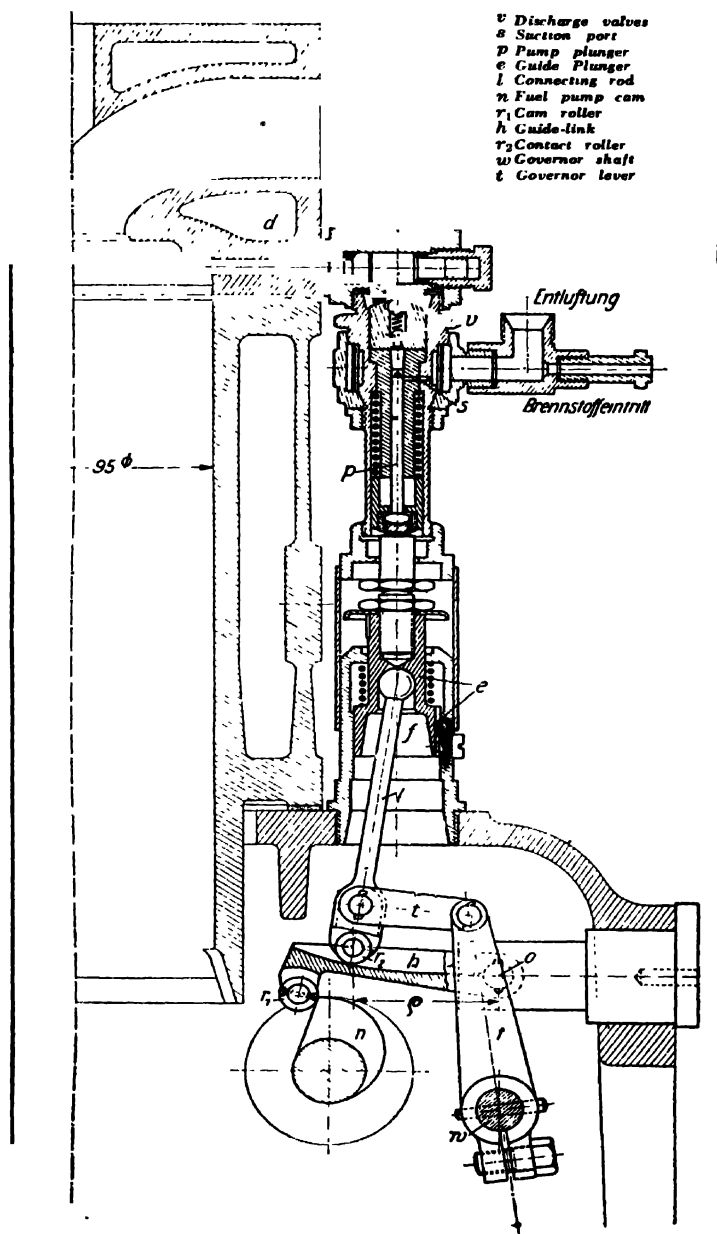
View Showing Construction of the Dorner Positive Acting Constant Lead Fuel Pump Believed Suitable for Automotive Diesel Engines. Relationship to Other Engine Parts Shown at Fig. 896.
